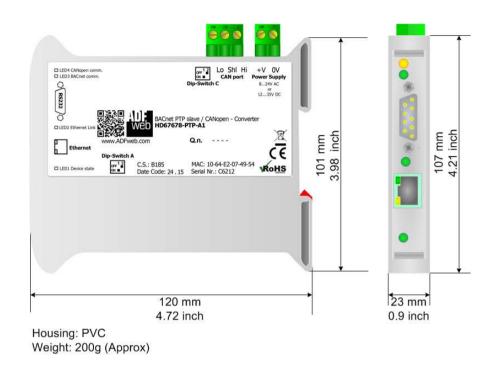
Mechanical dimensions scheme for HD67678-PTP-A1
